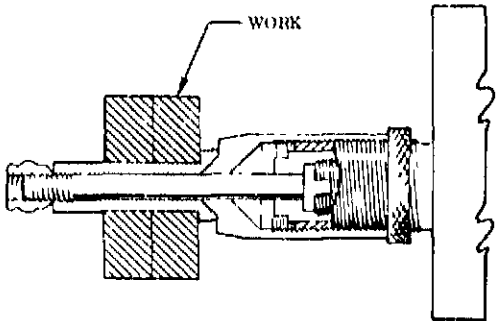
Power Unit Driving Tools for Gun BG2500
